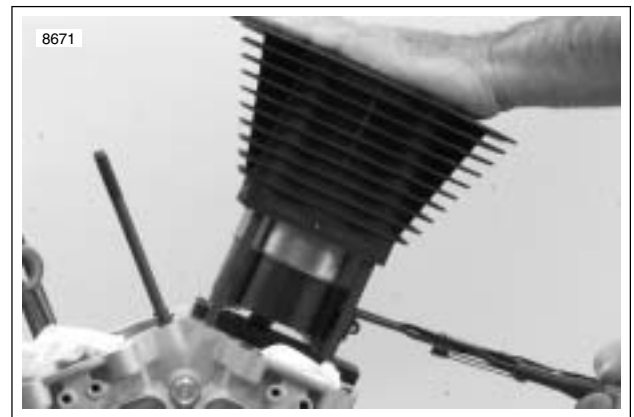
Compressing Piston Rings Using Piston Ring Compressor (Part No. HD-96333-51C)
